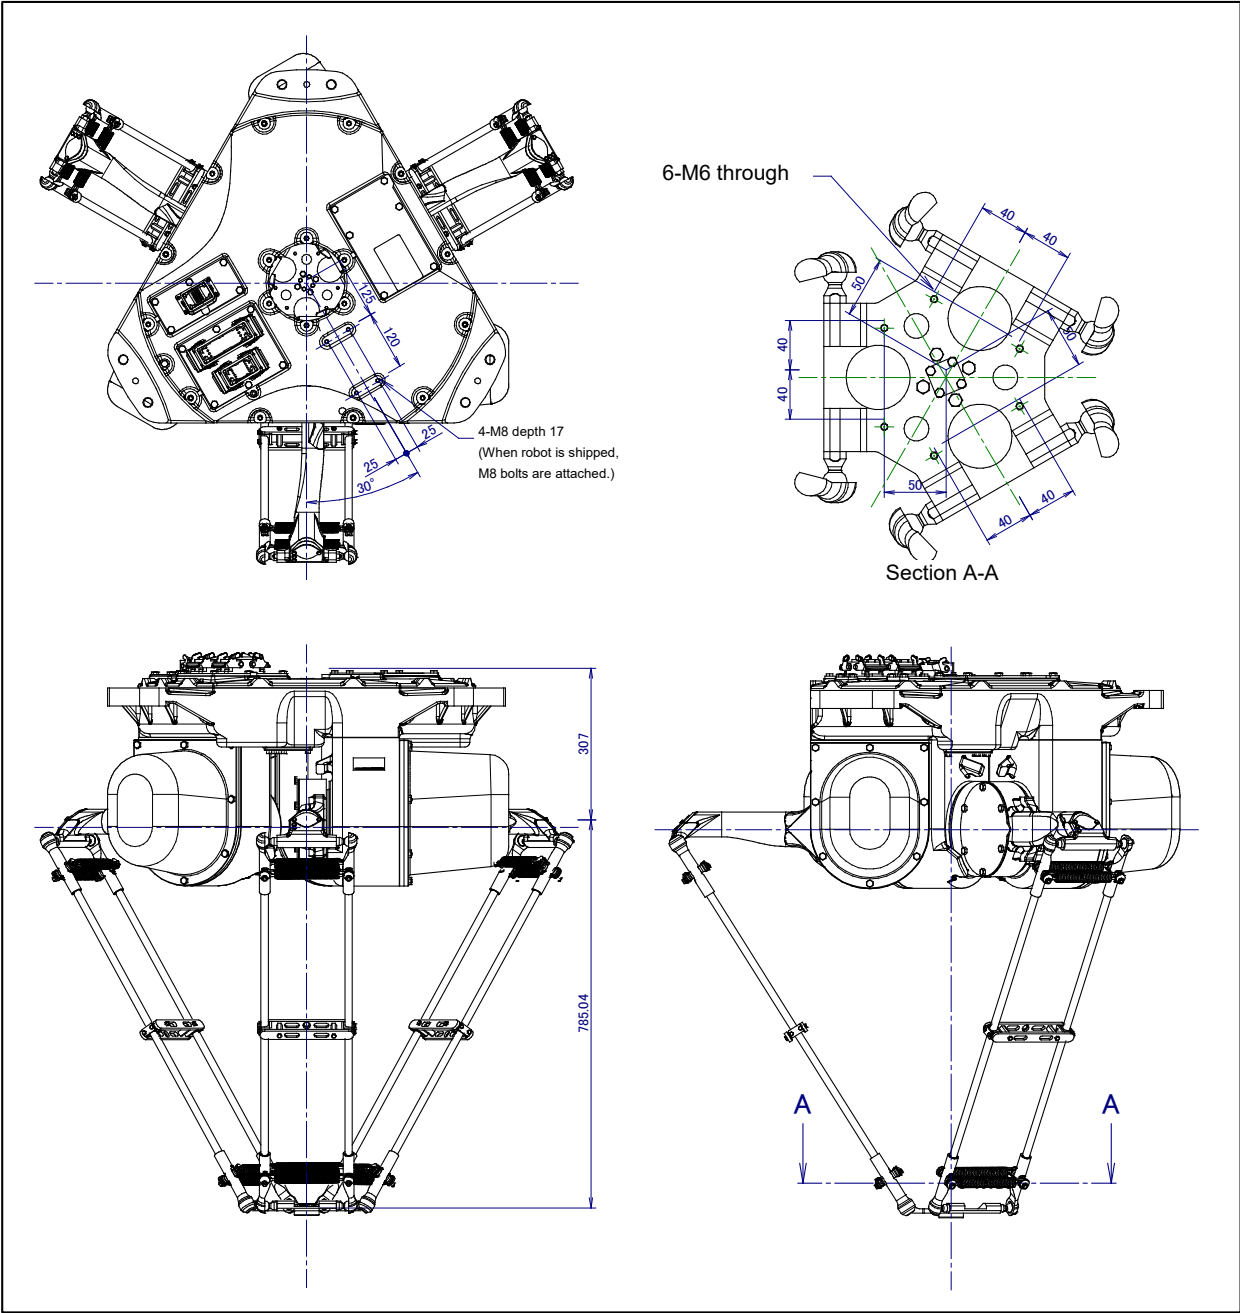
(d) Equipment mounting faces (M-3iA/12H)
